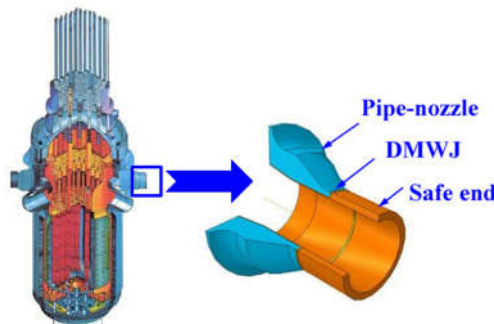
Connection diagram of the dissimilar metal welded joint (DMWJ) with pipe-nozzle and safe end.
